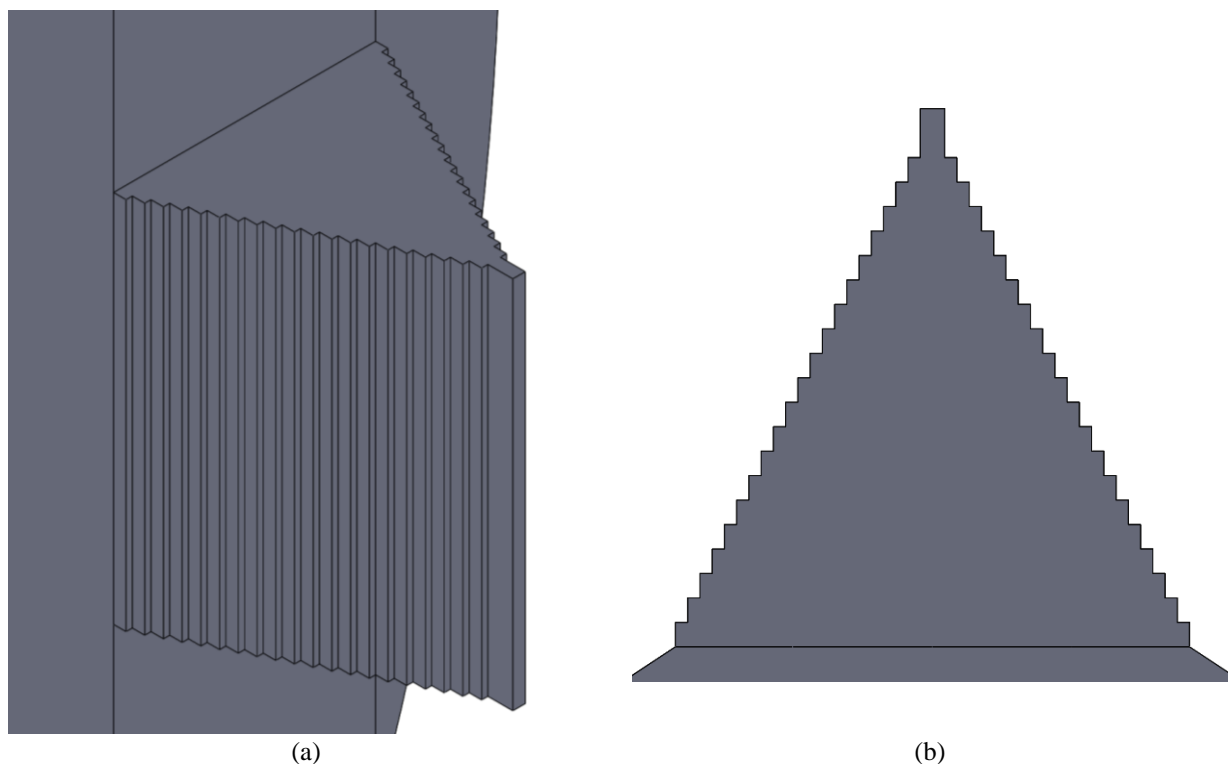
Stepped specimen design machined from rod (cylinder) stock, (a) isometric view (b) front view
